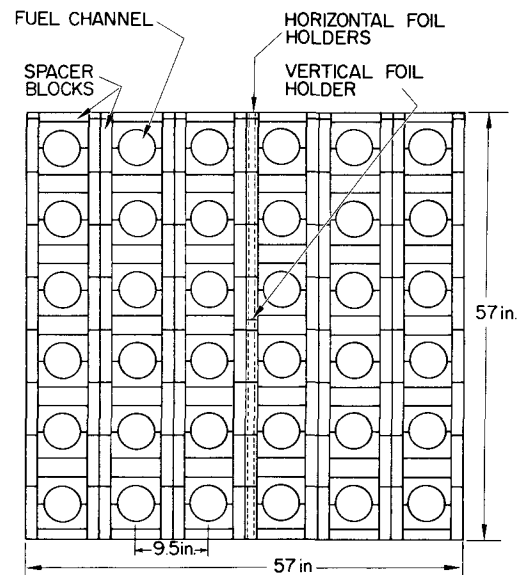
Nine-and-One-Half-Inch Square-Type Assembly
